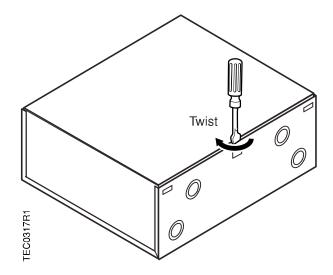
Enclosure 550-002 — First Step of Removing Cover (do both sides).
